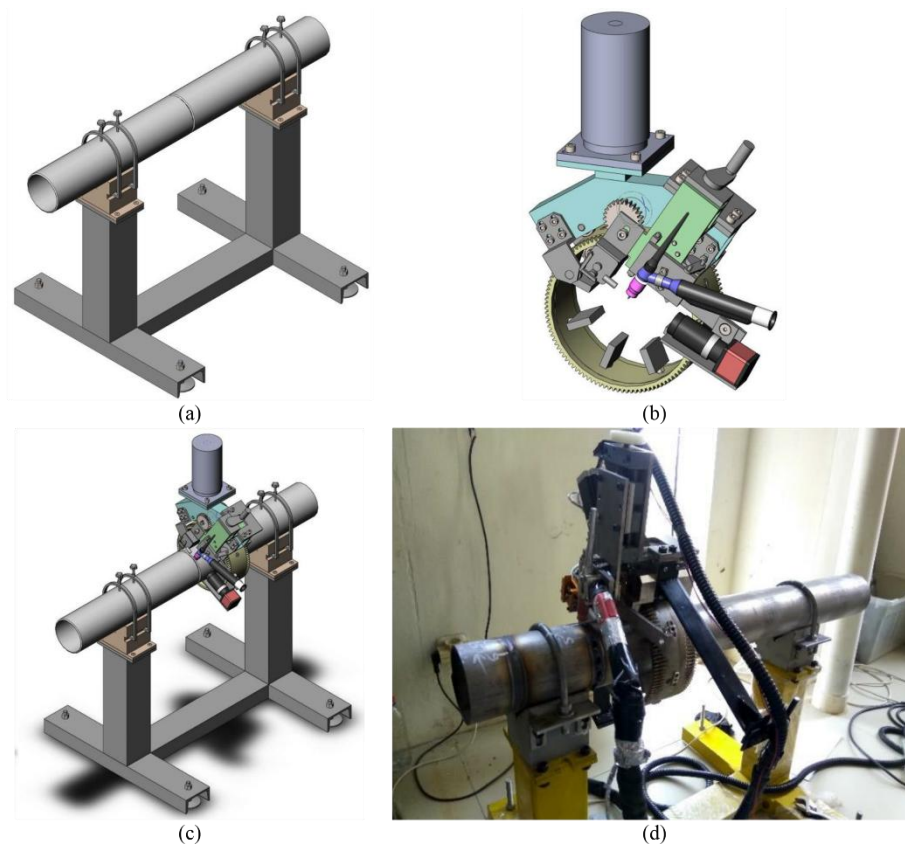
Design of (a) pipe support system, (b) gear-to-gear mechanism, (c) assembly of pipe support and gear-to-gear mechanism and (d) prototype of orbital pipe welding [18]
